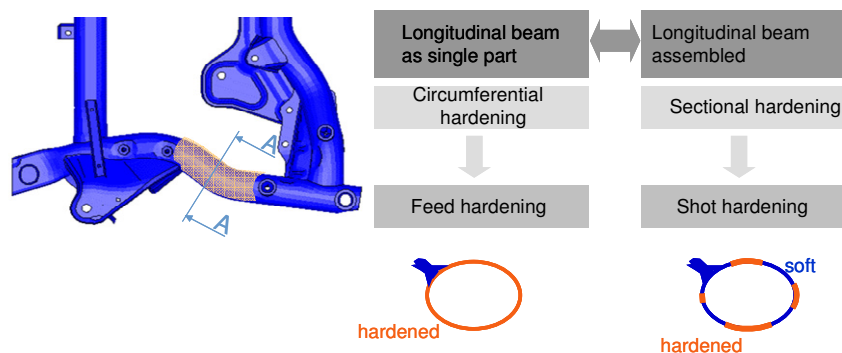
Local induction hardening of sheet metal weldments on the example of E-Class integral support via feed and shot hardening
